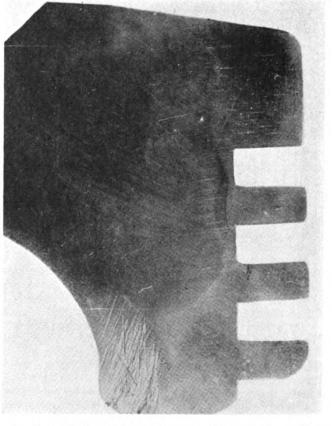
Enlarged section of a piston after being acetylene welded
